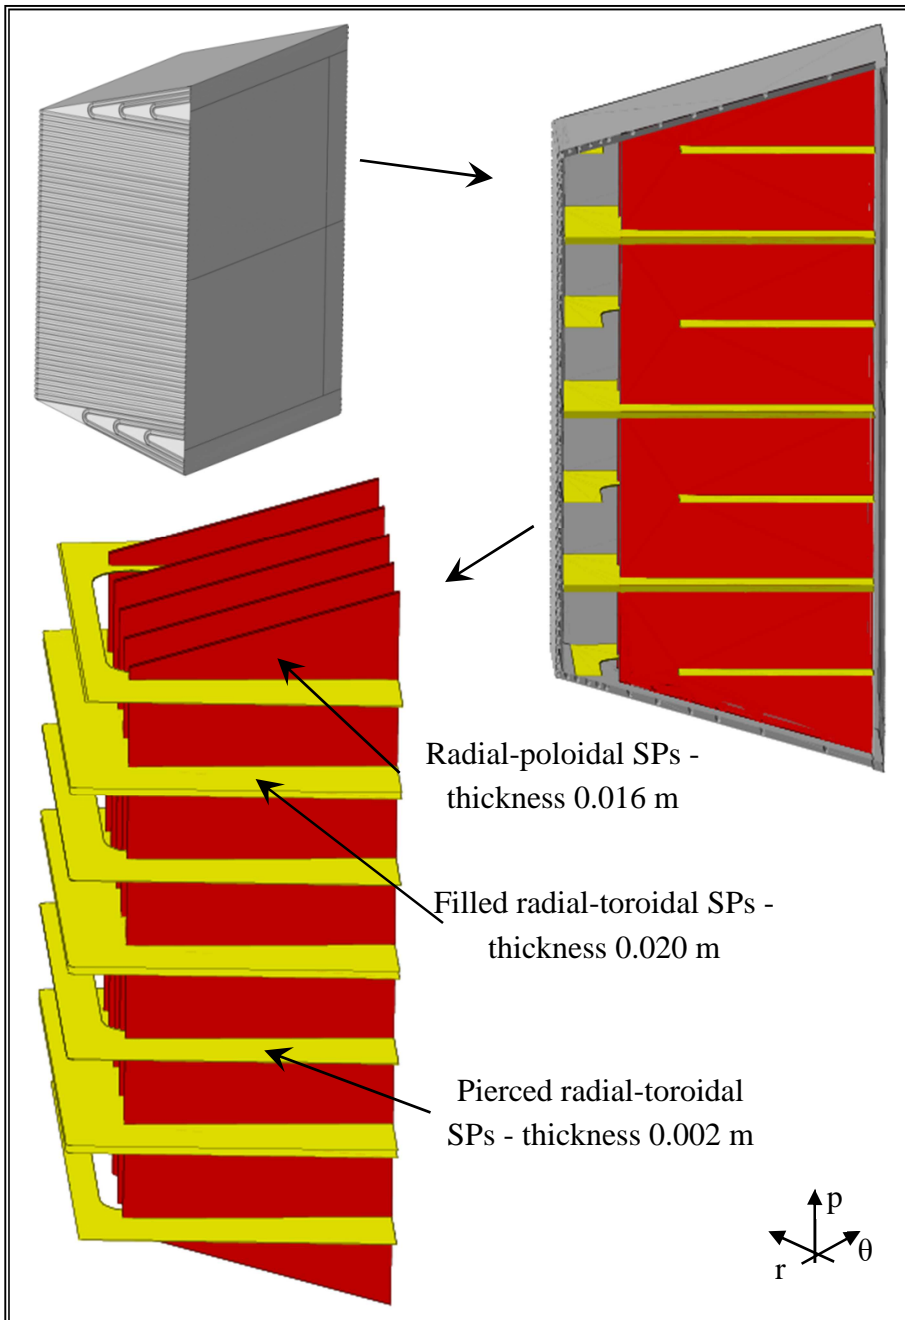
Configuration 4 - 3D geometric model exploded view.
